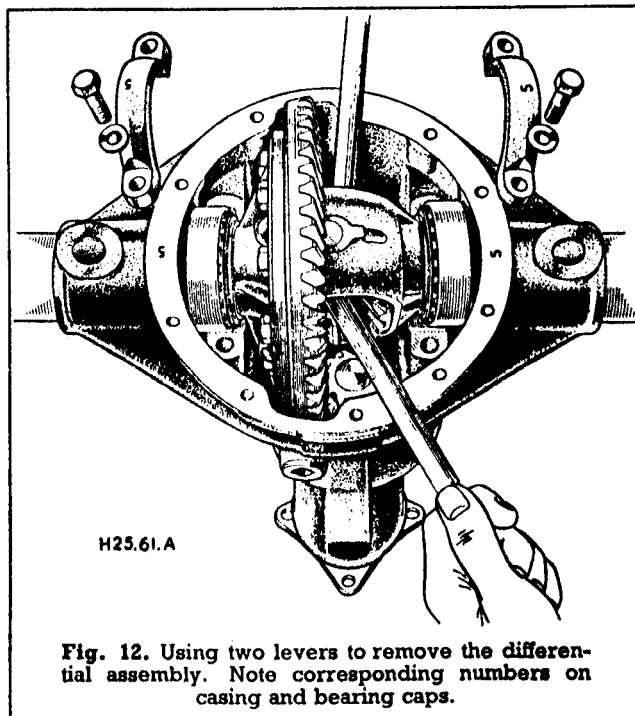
Using two levers to remove the differential assembly. Note corresponding numbers on casing and bearing caps.
